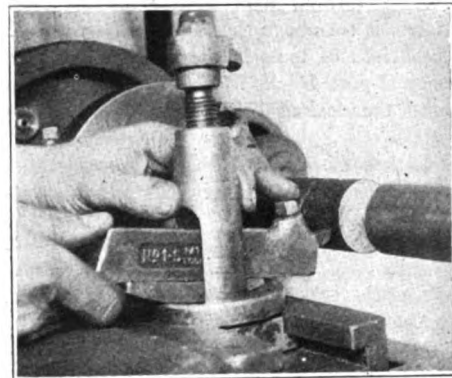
Adjust Tool Holder in Tool Support for Proper Height.
